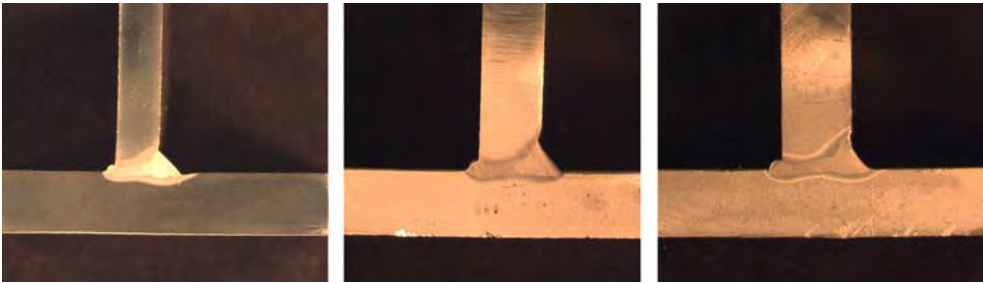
The macro samples from the fillet welding tests. From left to right, thicknesses 5mm, 8mm and 10mm
